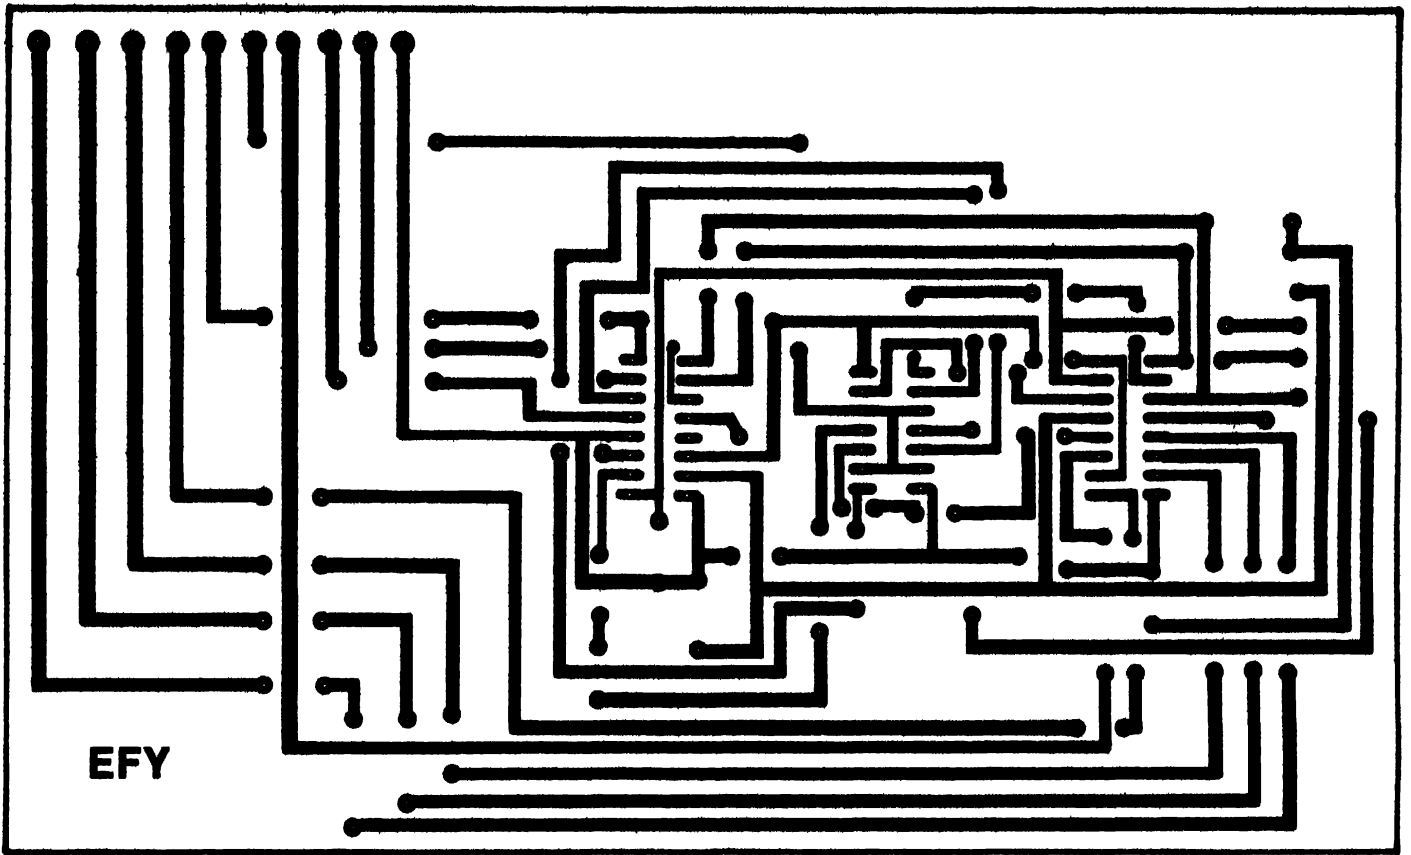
Actual size PCB layout of memory board for single display monitoring. To extend the display digit to two or three join two or three such boards serially
